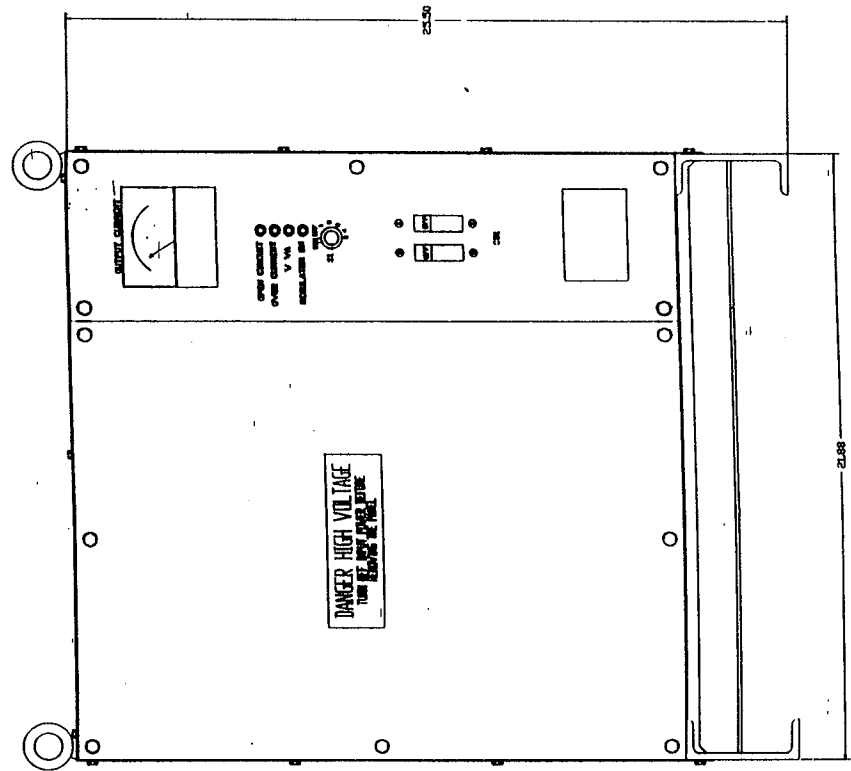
GENERAL ASSEMBLY (FRONT VIEW)
